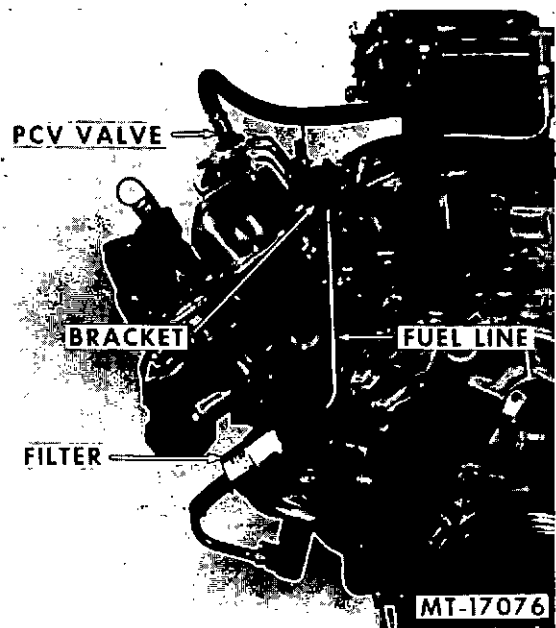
Fuel Pump, Fuel Filter and PCV Valve
